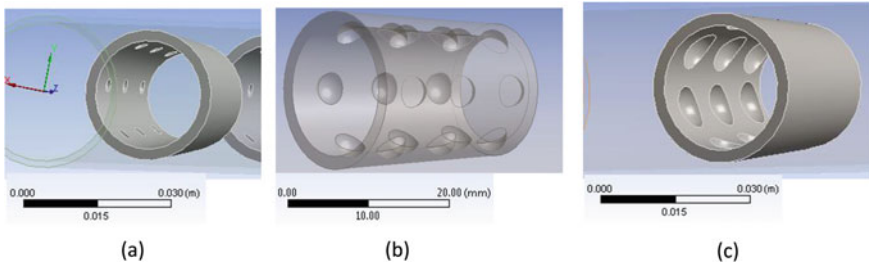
Geometry of conical-ring insert roughened with dimple inside of heat exchanger tube, a dimple diameter, $d = 3$ mm, b dimple diameter, $d = 6$ mm, c dimple diameter, $d = 9$ mm
